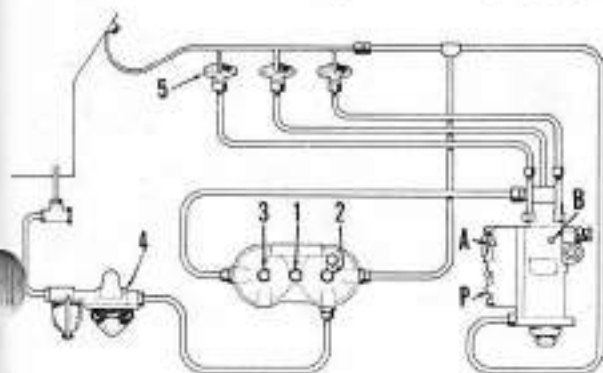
Drawing showing lay-out of diesel fuel system for 3-cylinder engine. Fuel pump (4) provides fuel under pressure to primary fuel filter (2).
